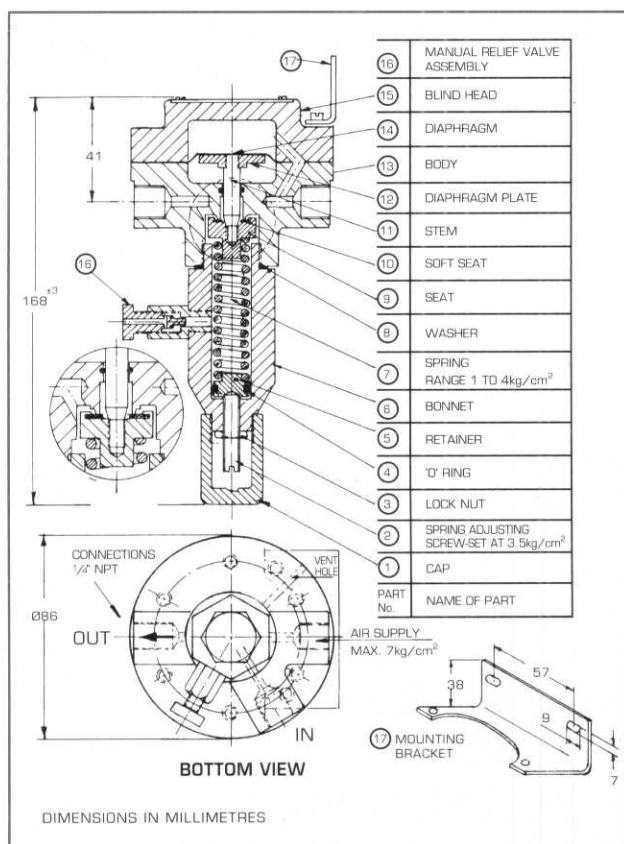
PA 12.12.11. Epoxy painted aluminium construction.
